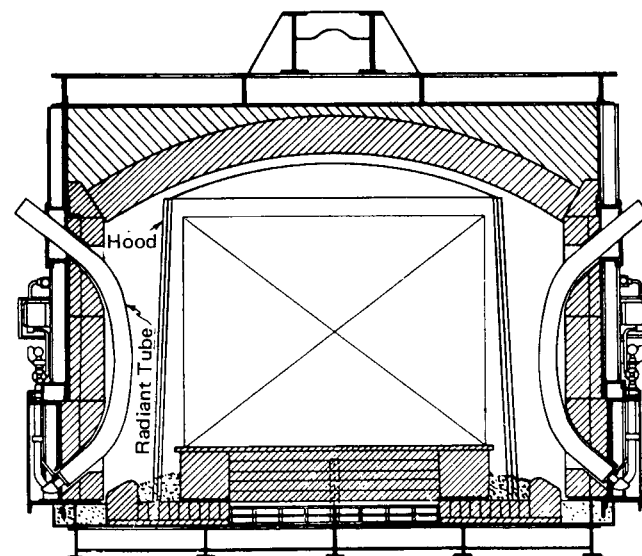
Example of a Radiant Tube, Muffle-type Annealing Furnace.
